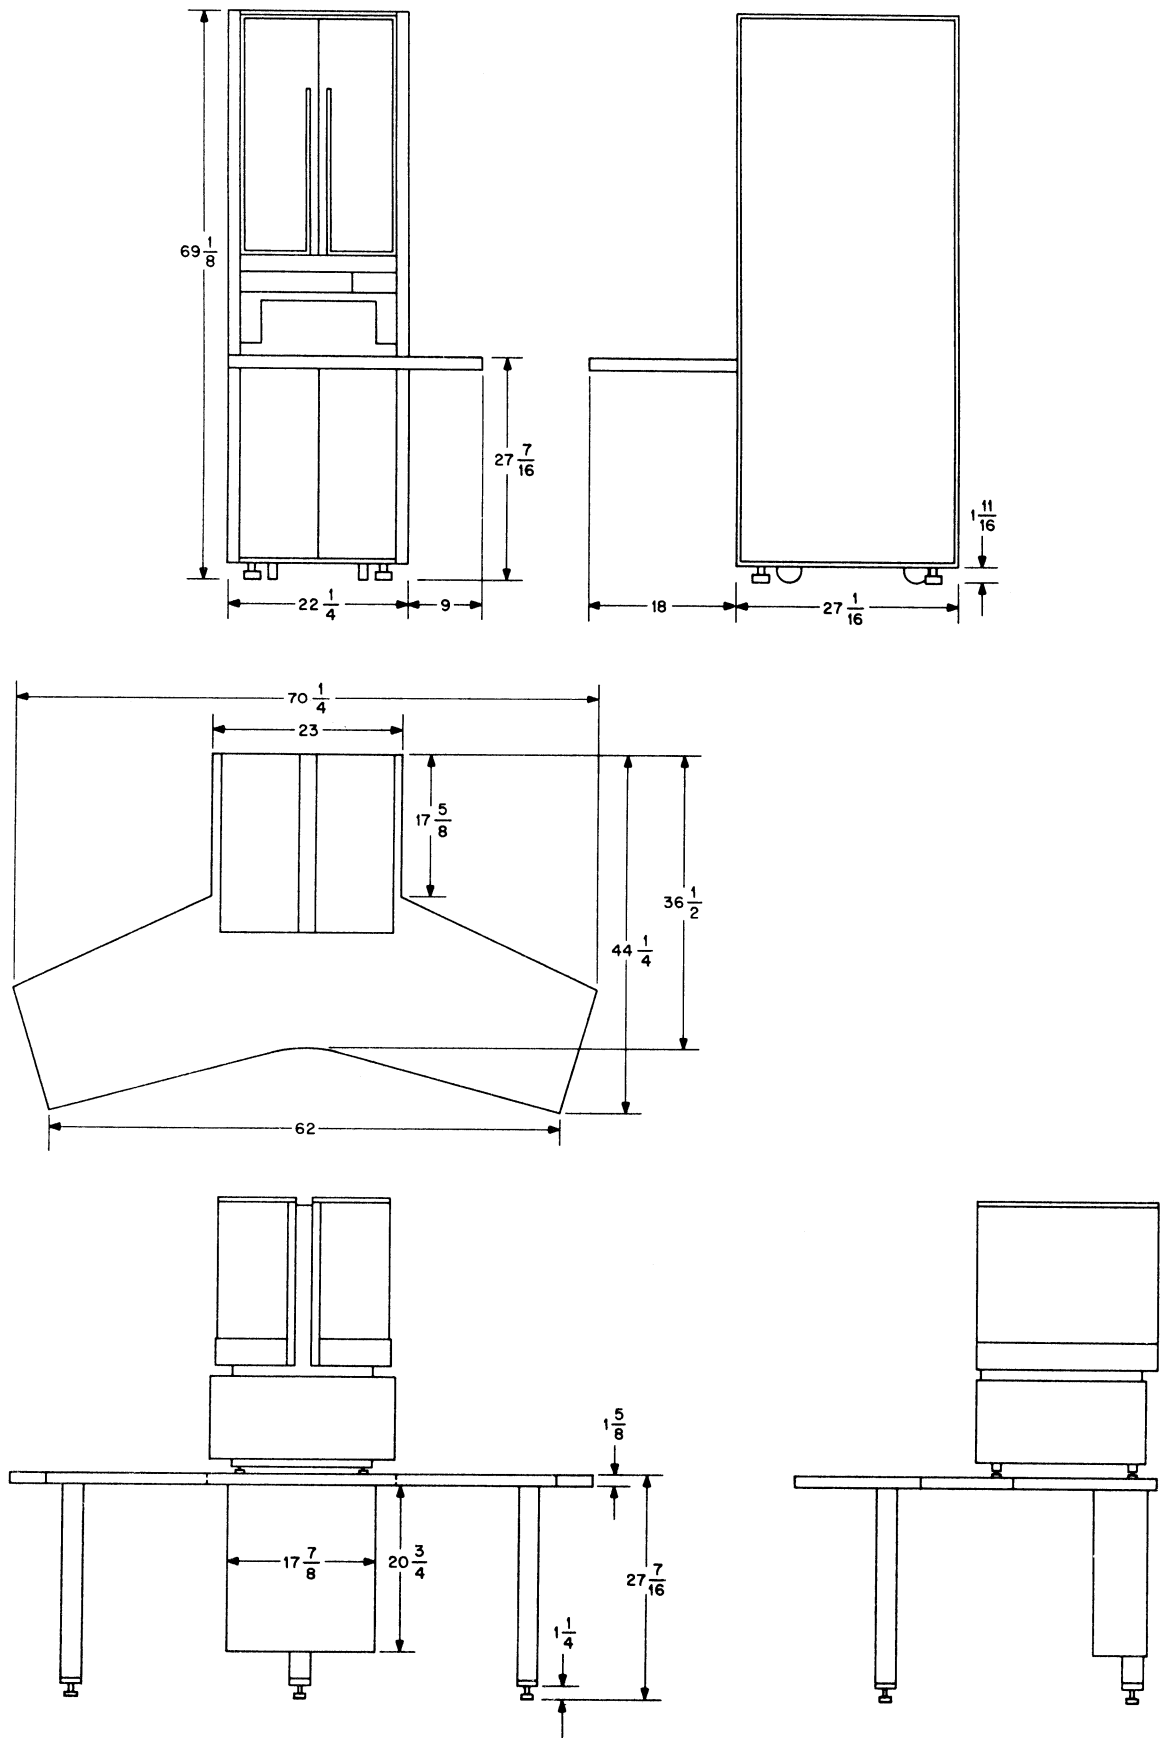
PDP-8 Optional Cabinet and Table Installation Dimensions
